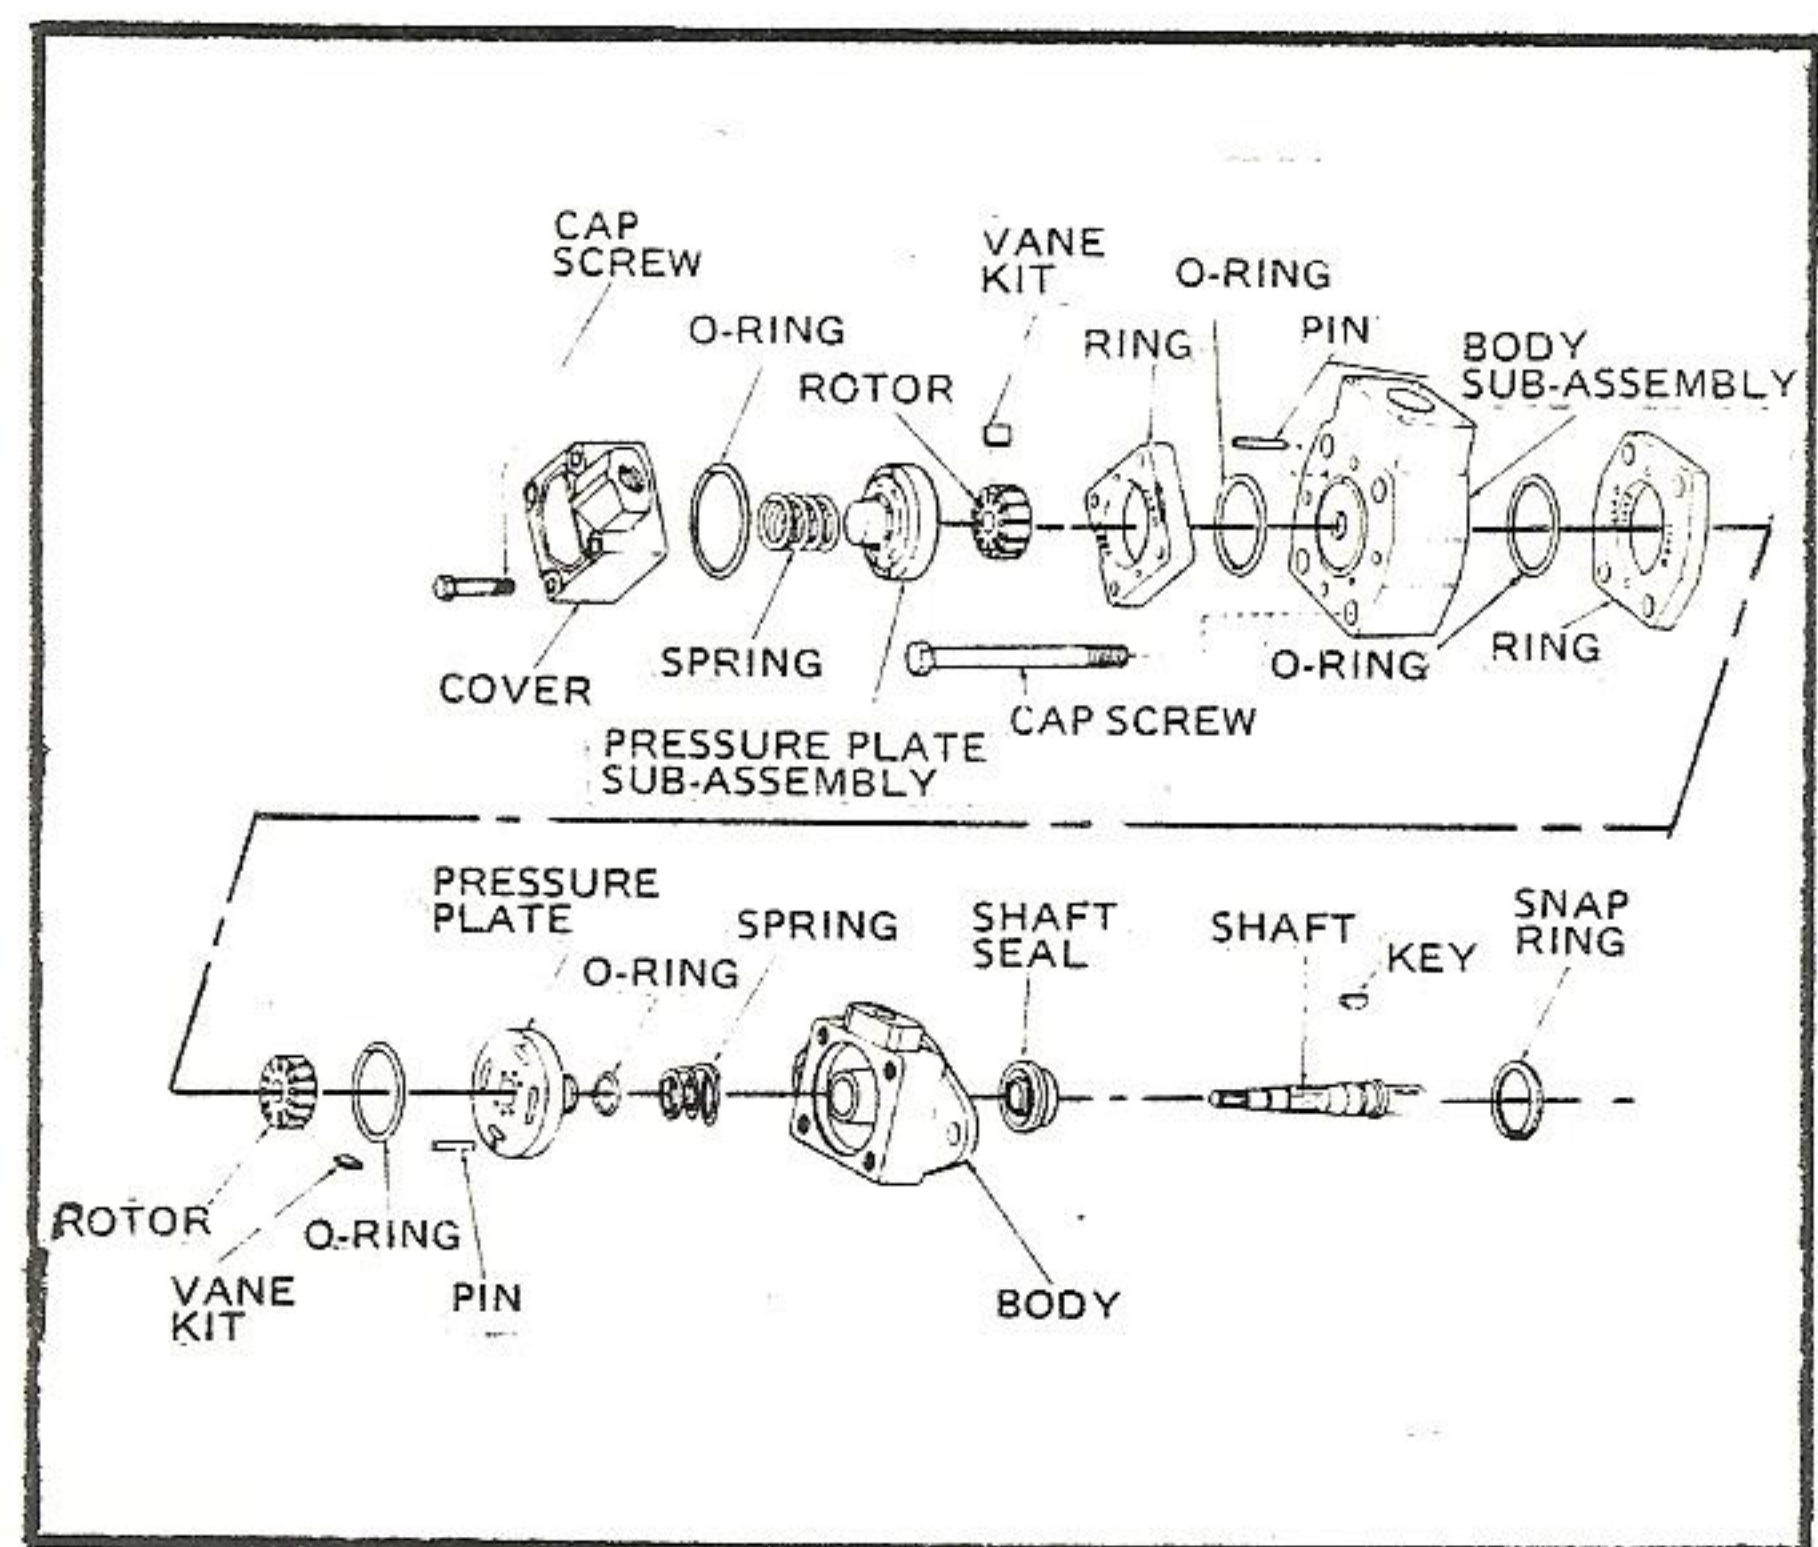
13. HYDRAULIC IMPLEMENT PUMP
